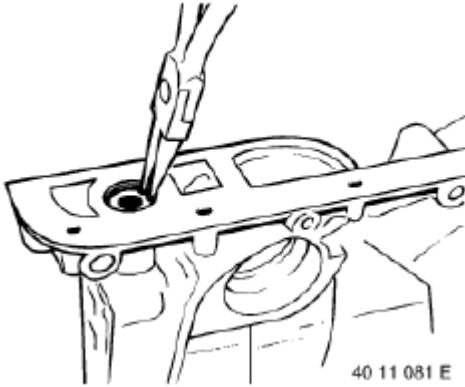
Locating Oil-Pump Cover Bolts
